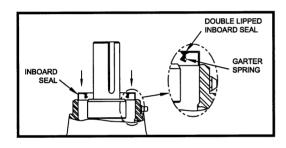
Orientation of Inboard Seal for Installation
